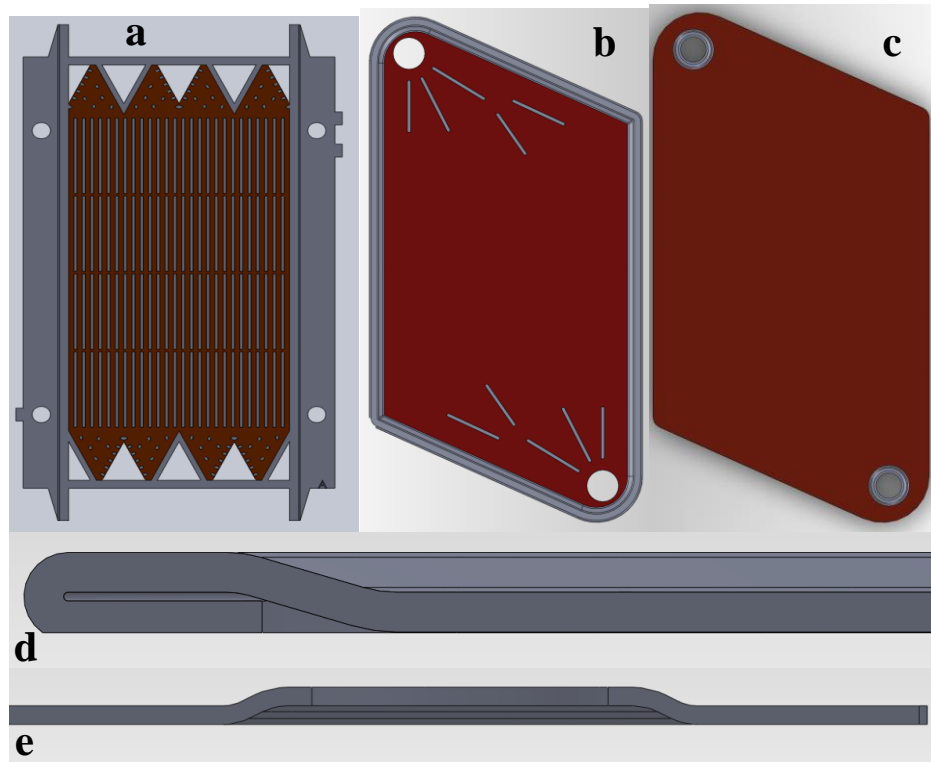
Lamina designs for the HTMR systems. Top views of (a) a representative lamina from the original HTMR design produced using PCM and laser welding; and (b) lamina A and (c) lamina B of the half-array HTMR design proposed in this paper. Also shown, (d) a cross section of the hemmed and embossed edge of lamina A which produces a fluid path and (e) a cross section of the header embossed into lamina B showing the raised feature and its corresponding valley.
